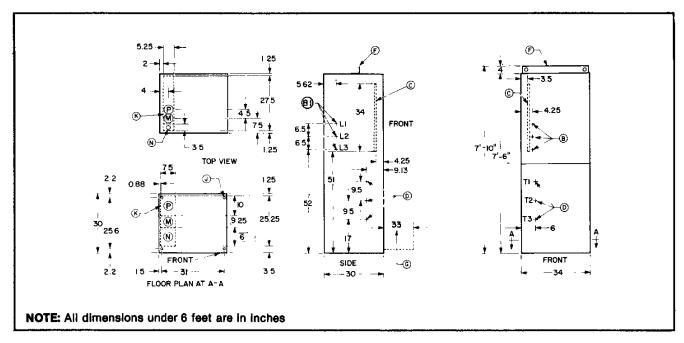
Typical dimensions, one-high design, extra-width/synchronous enclosure
